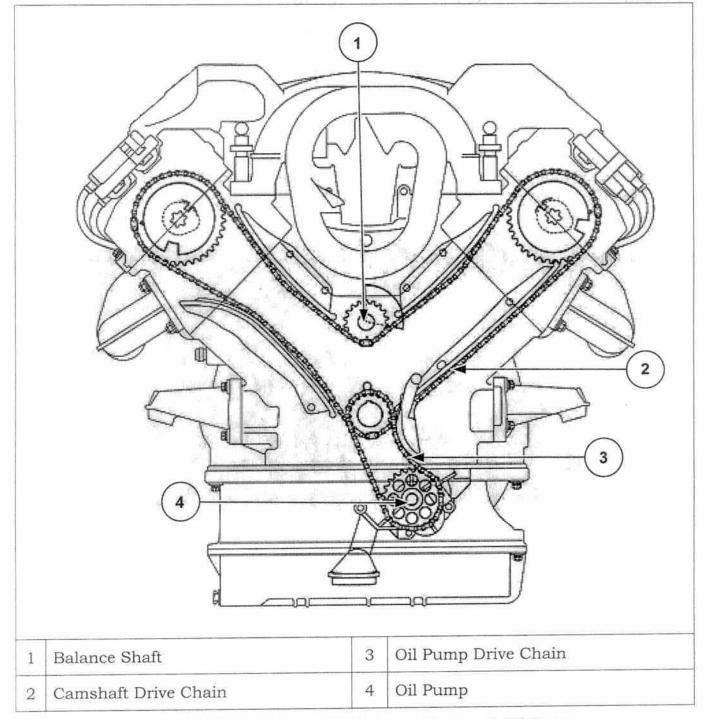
Chain Drives with Balance Shaft and Oil Pump
